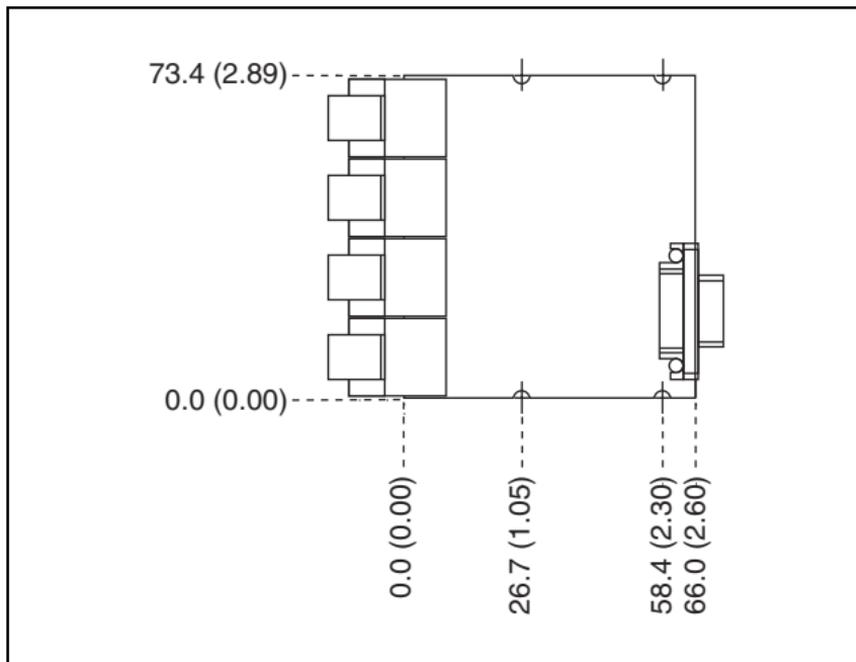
NI 9219E Dimensions in Millimeters (Inches)
